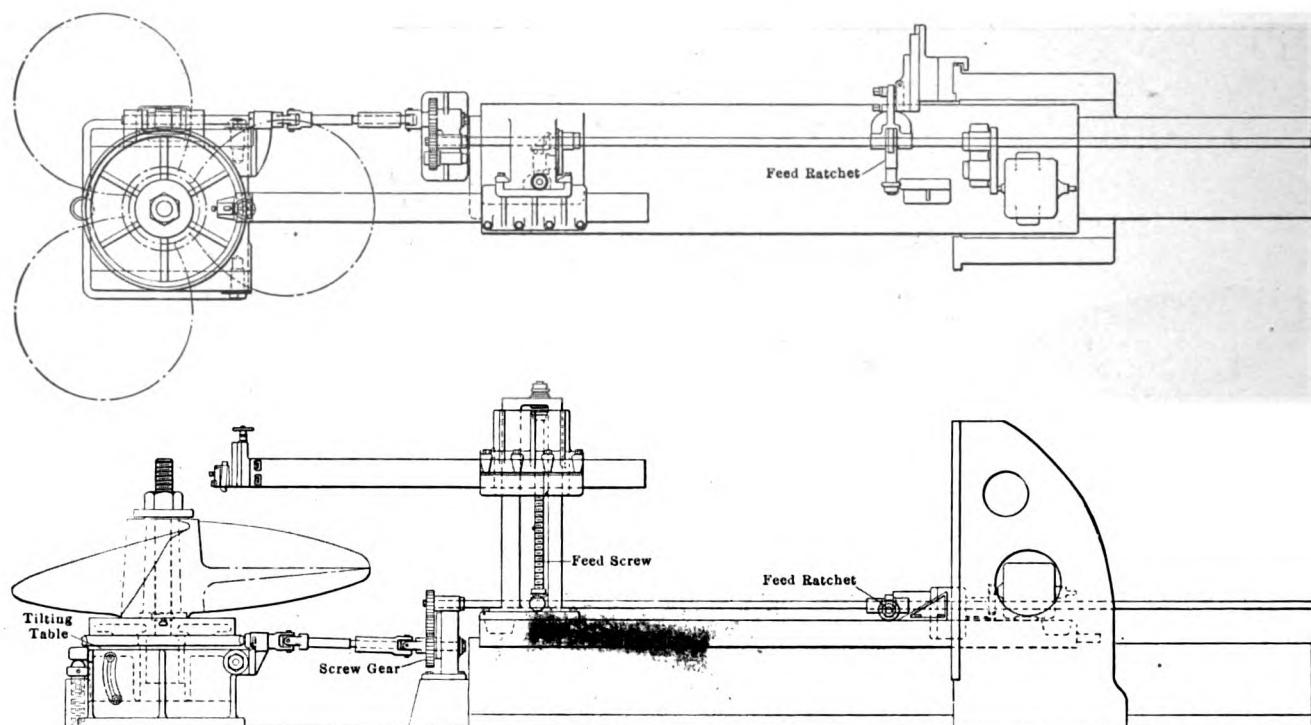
PLAN AND ELEVATION OF PROPELLER PLANING MACHINE.
